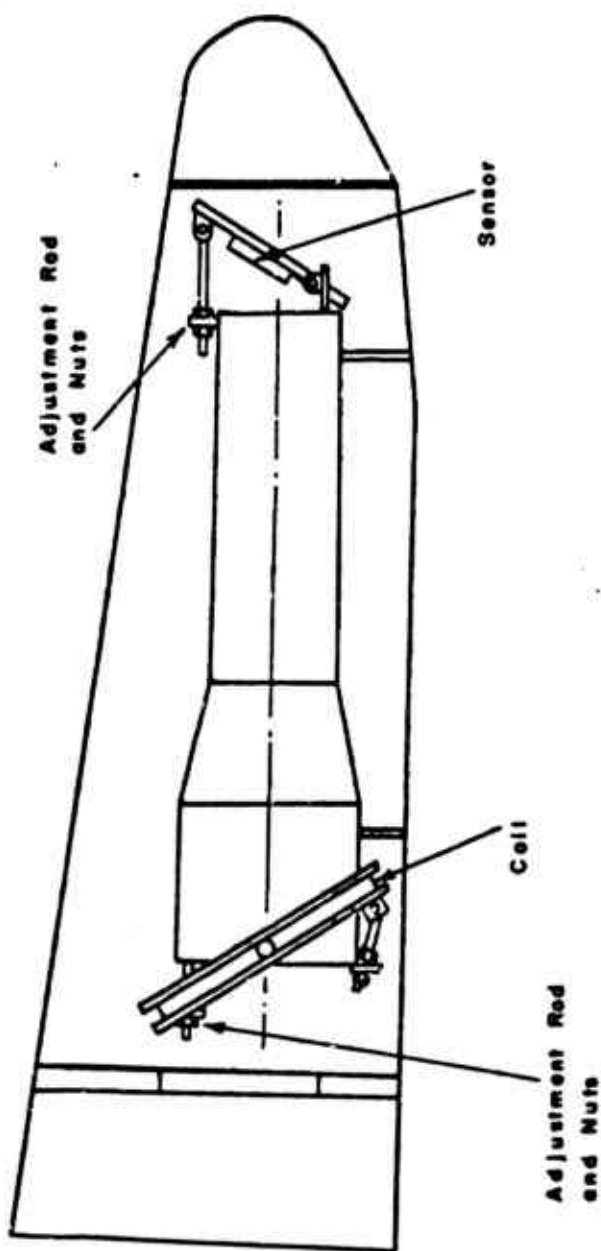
AMD8 Coil/Sensor Assembly Physical Layout
